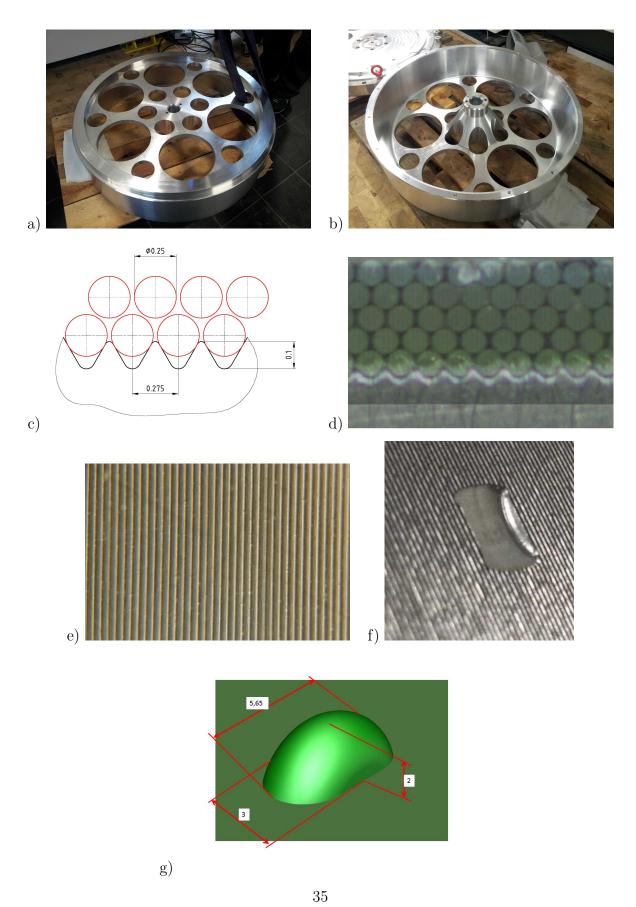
a) and b) winding wheel, c) schematic profile of winding grooves, d) visible produced profile of winding grooves and fibre windings on wheel, e) zoomed photo of winding grooves, f) zoomed view of milled alignment pin-hole in groove, g) drawing of resulting alignment pin after winding on wheel with alignment pin-holes in groove.
